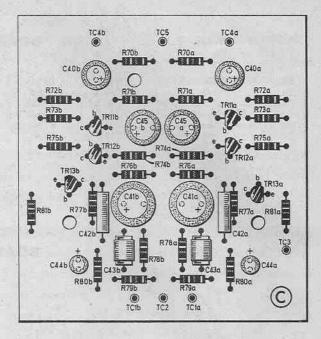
Board C of the 2020 Tuner Amplifier: top view showing components in position.
